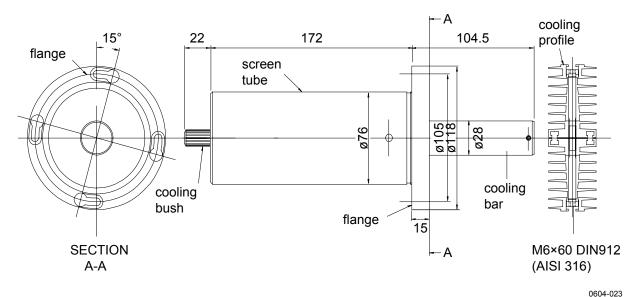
Parts of the Cooling Set (Dimensions in mm)
